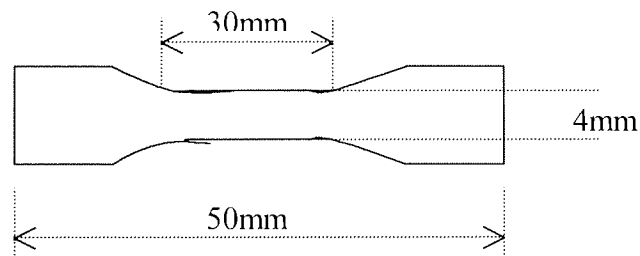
Dimensions of dumb-bell shape tensile test specimen
